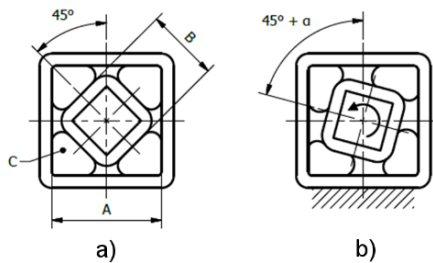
Construction of the metal-elastomer spring: a) unloaded spring; b) loaded spring; A – inner dimension of the square tube, B – outer dimension of the shaft, C – elastomeric working element
